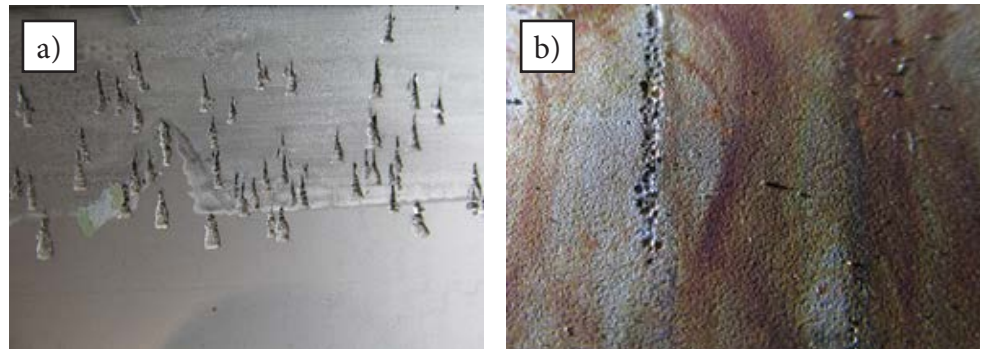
Exemplary pitting corrosion of stainless austenitic steel: a) pitting corrosion of steel AISI 316, b) pitting corrosion of a heat exchanger jacket made of steel AISI 304L
